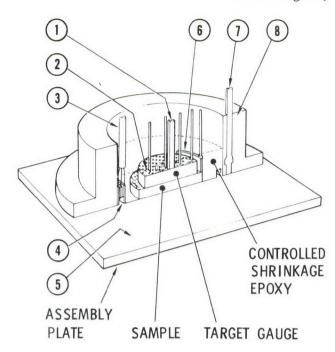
Cutaway view of sample target gauge assembly mounted on the flat assembly plate. The entire unit is held in place against the plate and encapsu-lated with epoxy potting. The quartz cyrstal and target material are held in intimate surface contact during epoxy encapsulation and cure procedure. After the epoxy has cured, the entire target assembly is removed from the plate. The individual parts shown are: 1) Nylon Rod, used to press target gauge and sample against assembly plate. Numerous rods may be used for thinner gauges as well as nylon disks for gauges of thinner than 0.15 inches. 2) Indium Soldered Lead Wires. These short wires are later connected to coaxial cables and load resistors after potting. 3) Cable,
